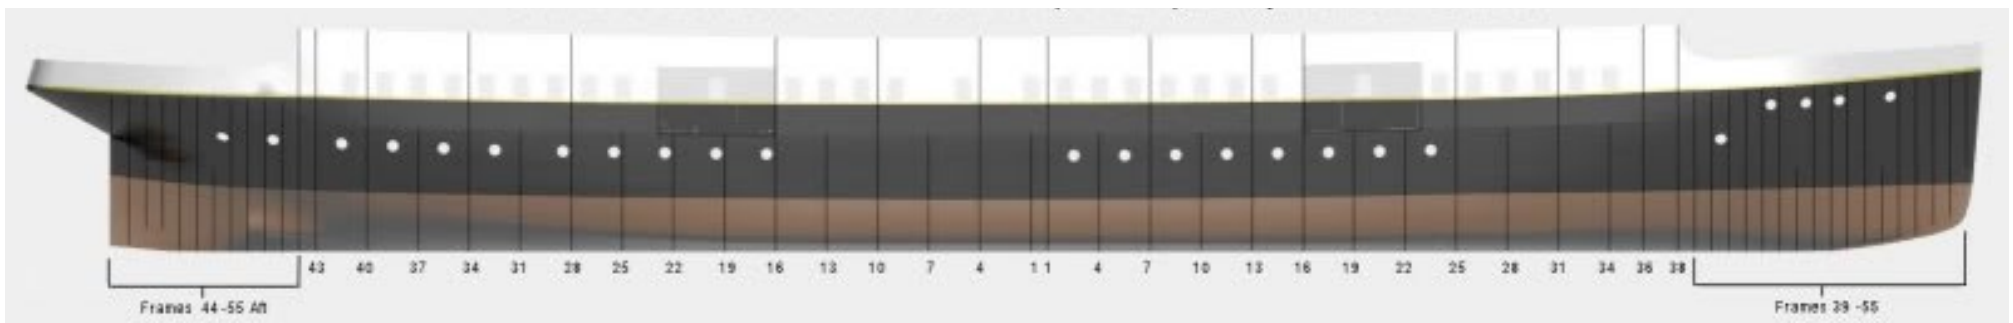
Frame Station Elevation Guide of SS Nomadic (Pitchard, 2009)
